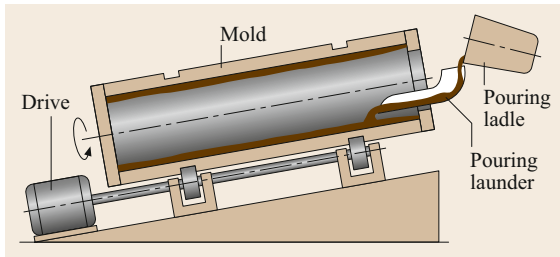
Centrifugal casting (after [10.1, 6])
